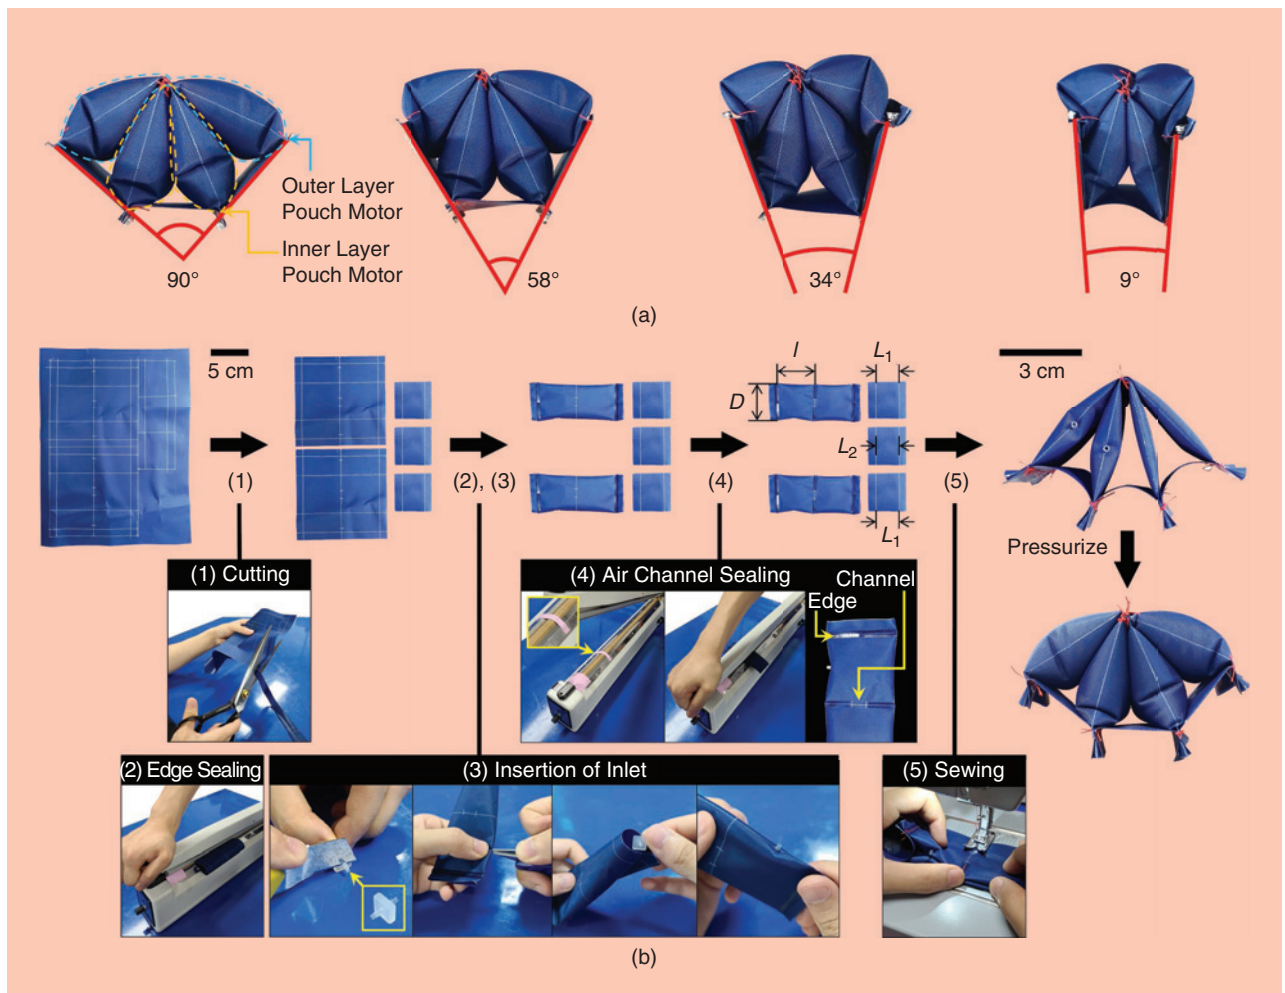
(a) The bending motion of a single pouch motor pattern. (b) Its manufacturing method by cutting the material, sealing the edge, inserting the inlet, sealing the air channels, and sewing the pouch motors and constraint together.
